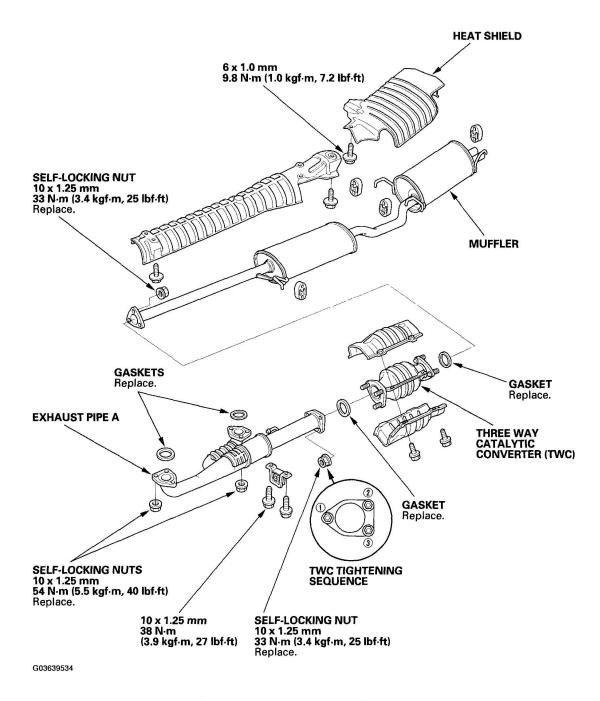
Exploded View Of Exhaust Pipe And Muffler (2003 Model) Courtesy of AMERICAN HONDA MOTOR CO., INC.
